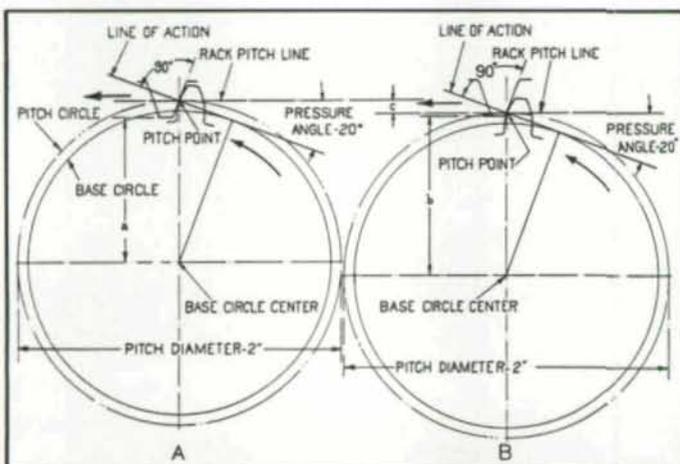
Diagram Illustrating That the Pressure Angle and Pitch Circle Diameter Do Not Change When a Gear Tooth Is Moved Closer to or Farther Away from a Rack.
